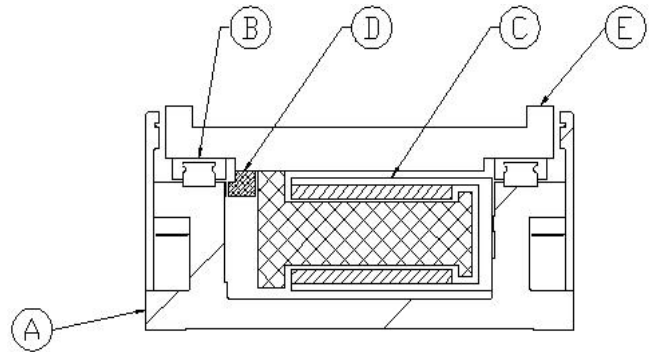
Typical linear motor cross section showing A: base, B: bearing rail and block, C: linear motor and magnet, D: Linear encoder and scale, E: carrier for payload.
